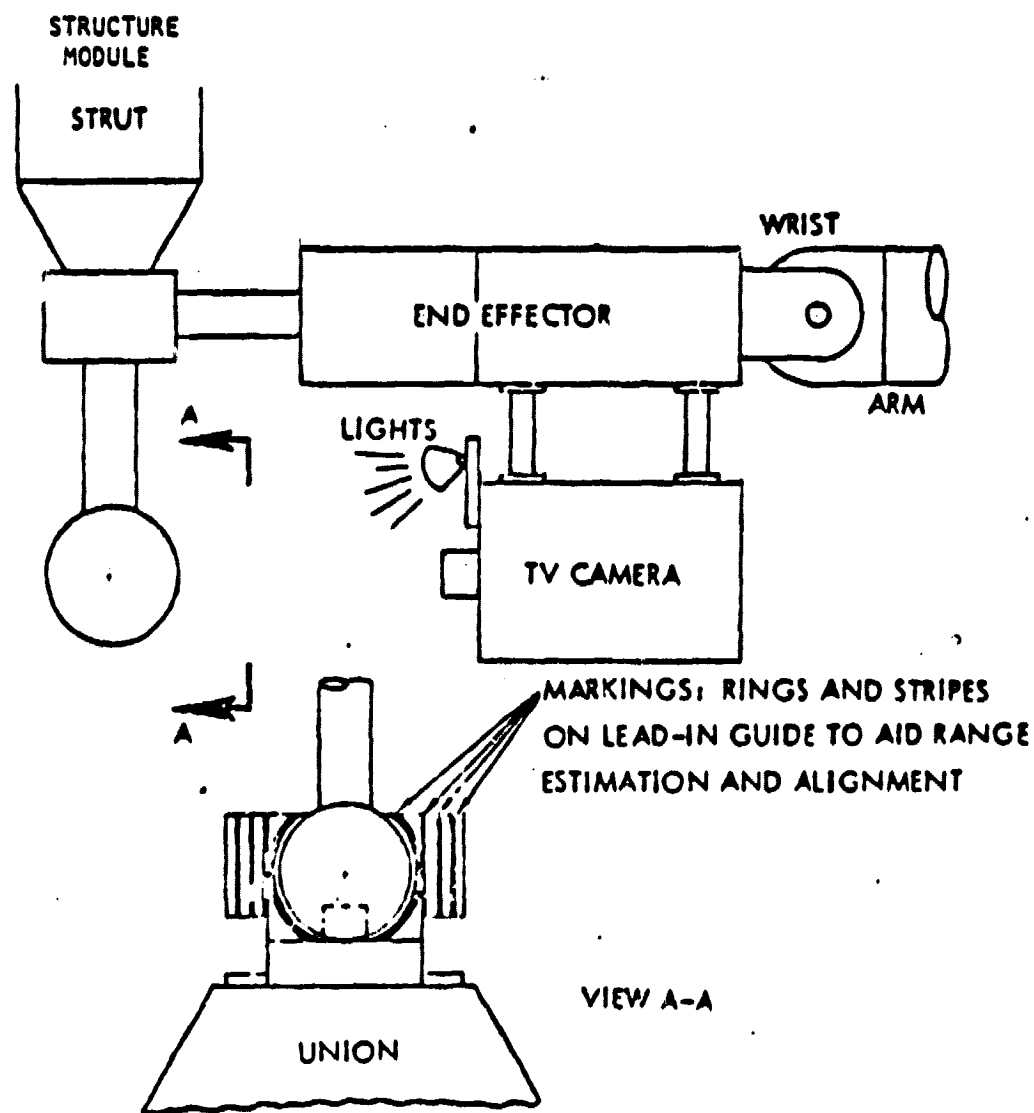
Target Viewing for Multi-Point Attachment Fittings
